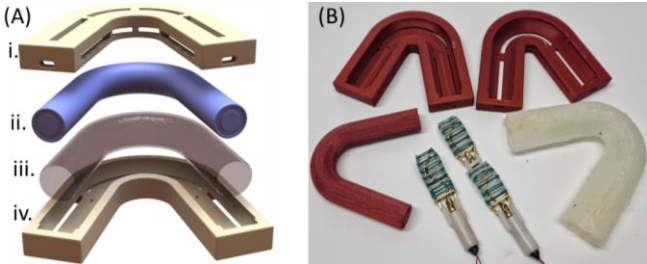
The fabrication process of the tubes. (A) A model of the mold and the molded tube. (B) The PLA 3D printed mold, produced silicon tube and the experimental robots.
